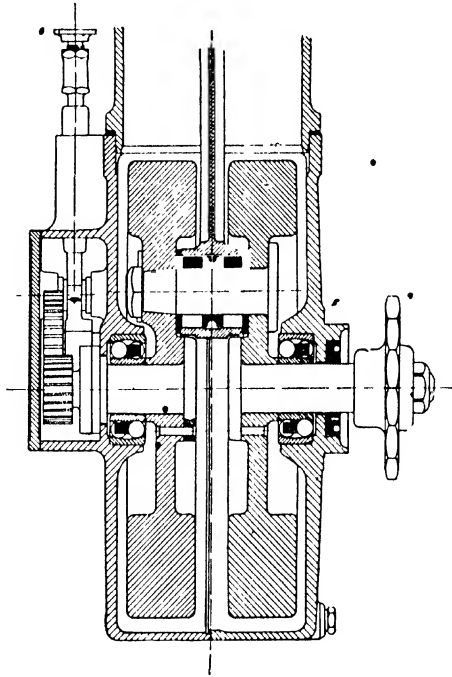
Section of "Triumph" Crank-chamber, showing Ball or Roller Bearings
